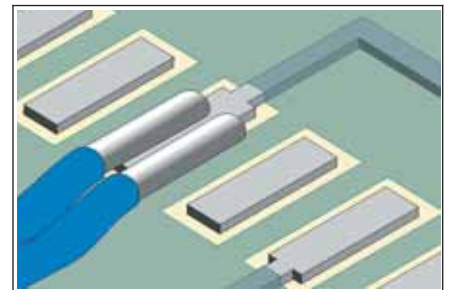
Not Recommended Multiple wires soldered to conductor, contact, SMT pad.
